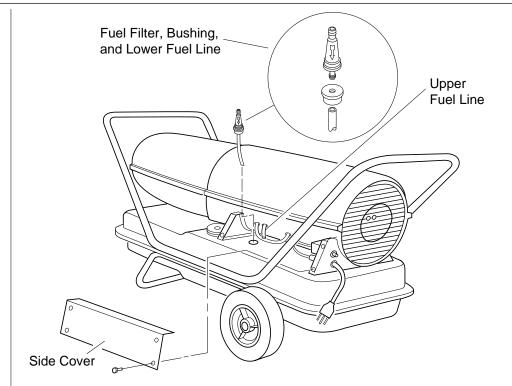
Fuel Filter Removal, 90,000 BTU/Hr Model
